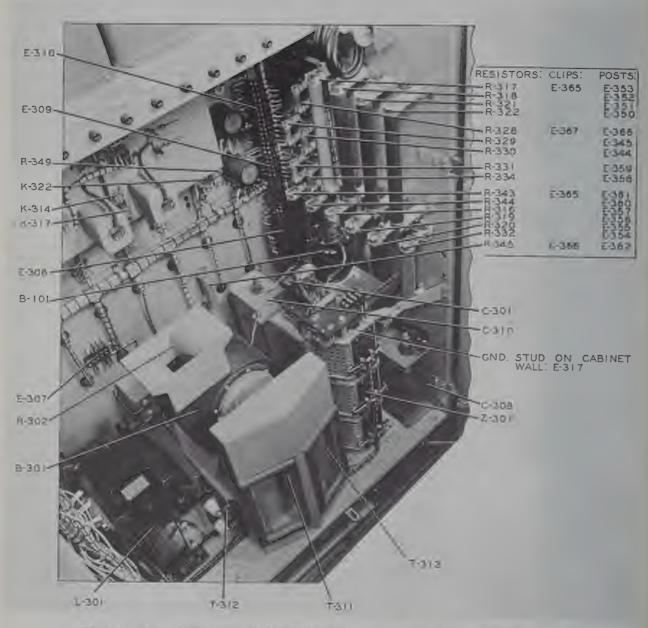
Power Supply Assembly PP-1088/FRT-26, Lower Left-Side Cabinet Wall, Rear View.
